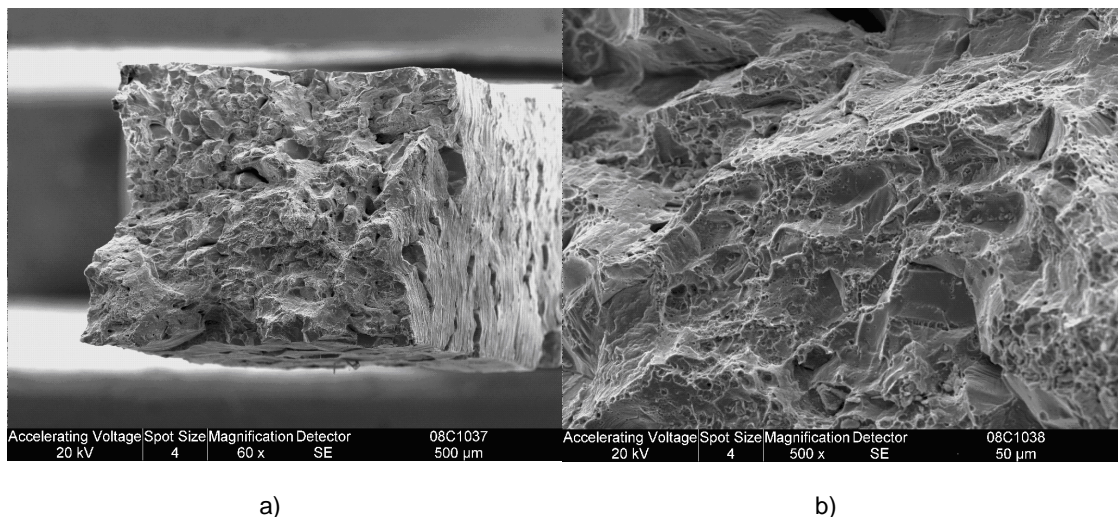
SEM images of the fracture surface of alloy BGA4 after SSRT at 500°C showing ductile dimple cracking, TGSCC and IGSCC on the main fracture surface.
